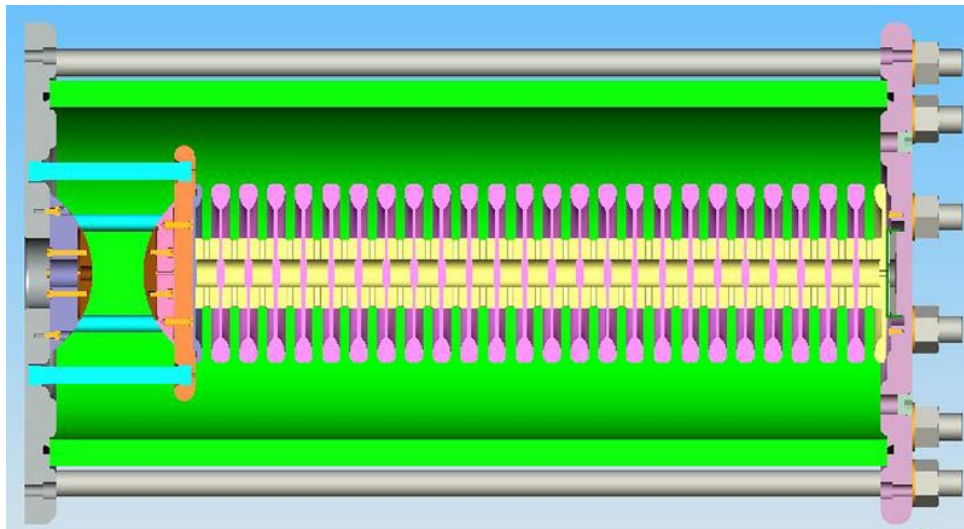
The Z-like switch. The six insulating rods, instead of the trigger housing, maintain the trigger gap.
